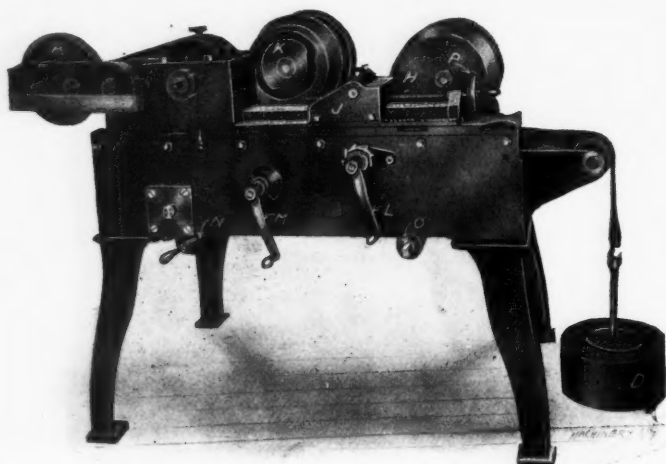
The Rowbottom Universal Cam Cutting Machine
